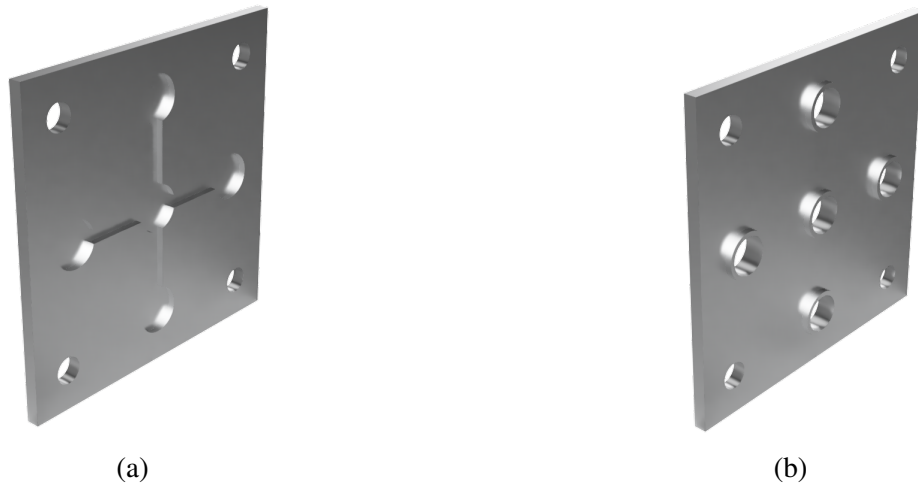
CAD designs of the TEM grid sample holder a) backing and b) locking plates.
